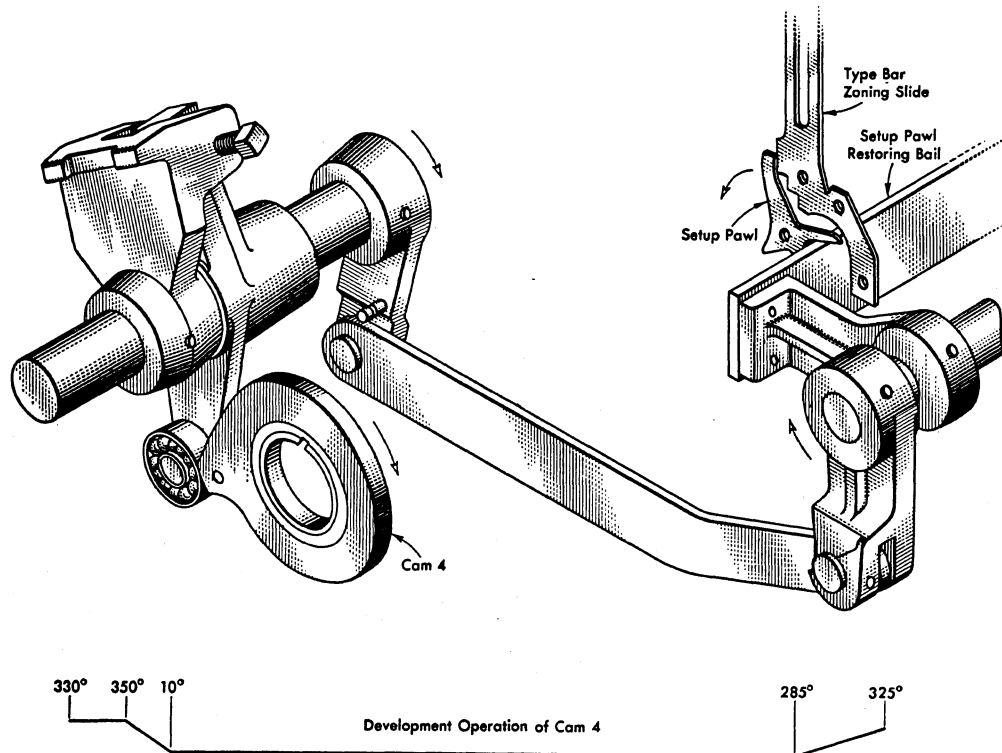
Zone Control Drive Unit, Cam 4 Mechanism
